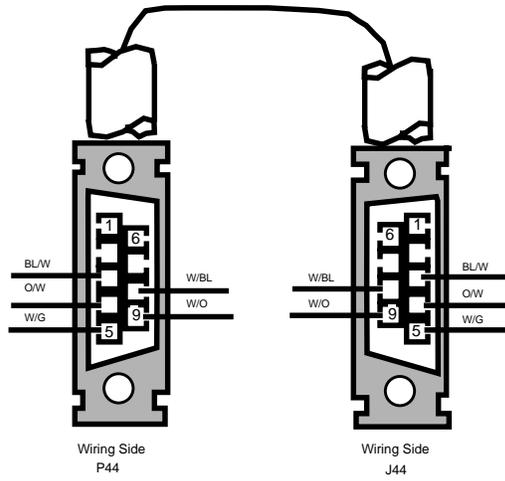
Cable Assembly ED7C723-30 Group 17
